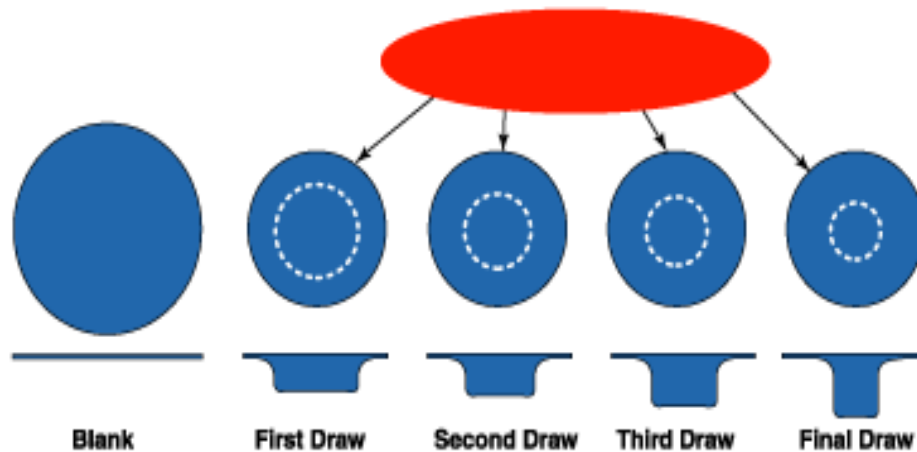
During draw reductions, the blank diameter should not change after the first draw
